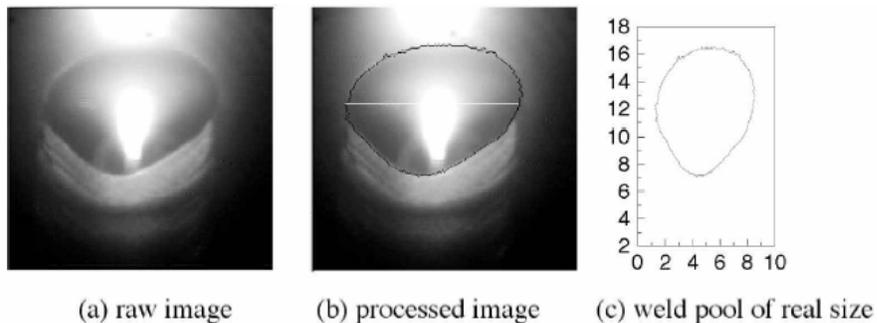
, Weld pool geometry at current of 100 A and speed of 113mm/s [24]
